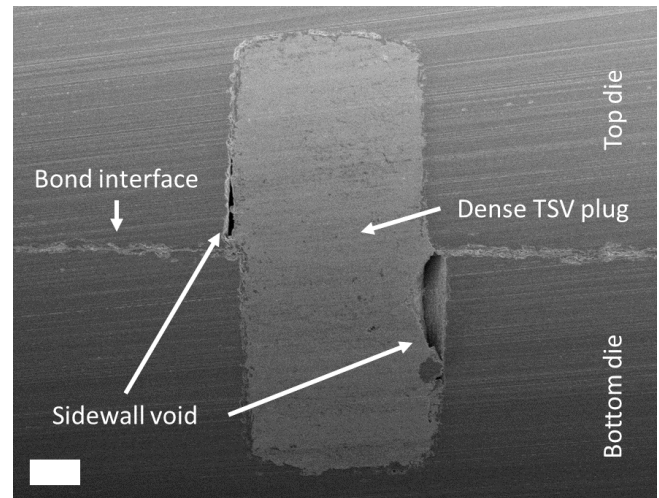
Cross-sectional SEM of die-to-die bonding of 80 μm critical dimension circular TSVs showing dense filling. Scale bar is 20 μm .
